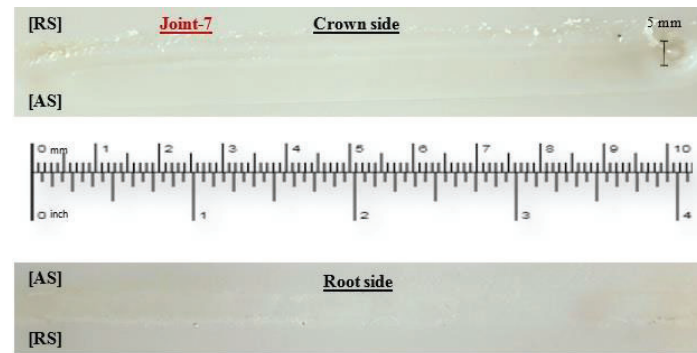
Joint-7 material flow, surface finish, and surface defects
